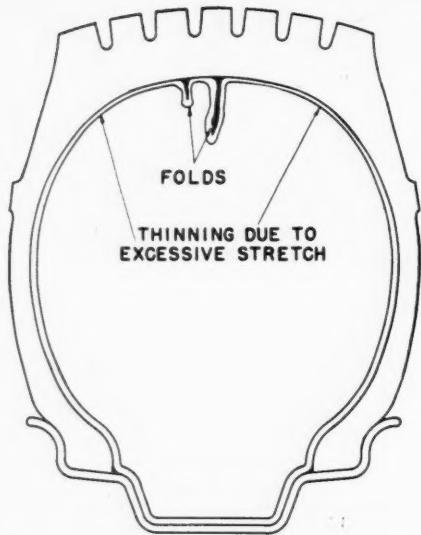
Example of "Cold Weather Buckling" of Butyl Inner Tube
